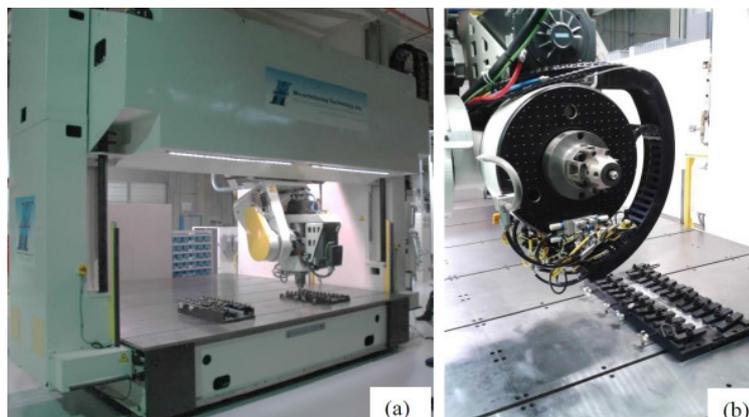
FSW dedicated equipment model GG-7: (a) General view; (b) Machine detail
